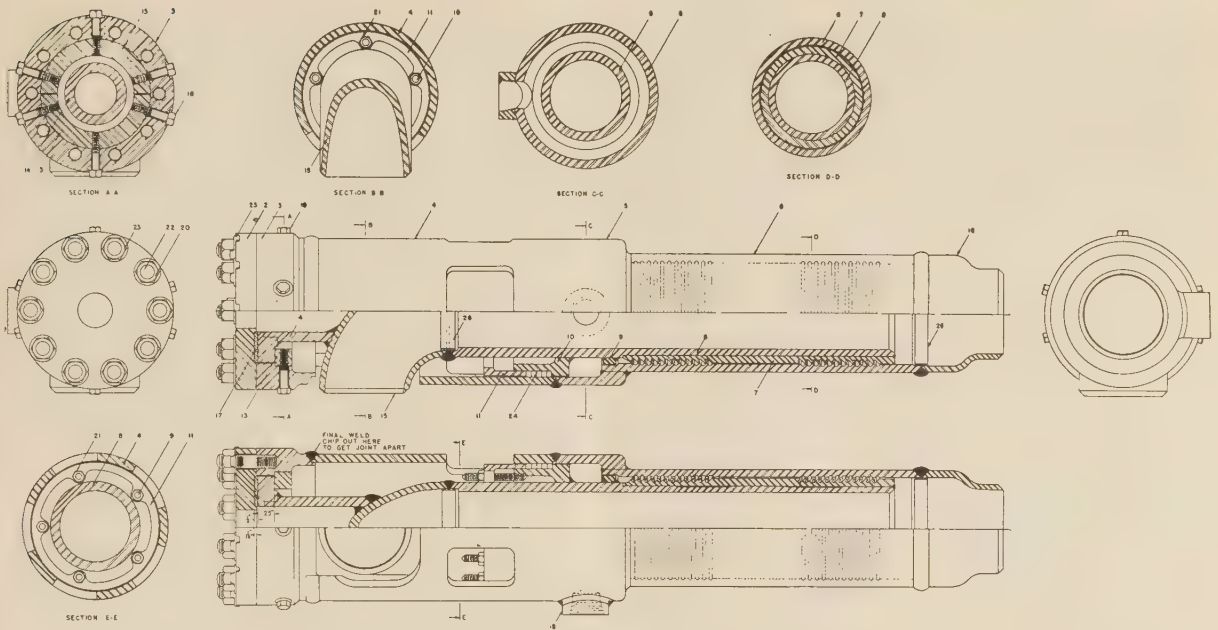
VIEW OF HIGH-PRESSURE EXPANSION LOOP ON END OF BOILER CAR
